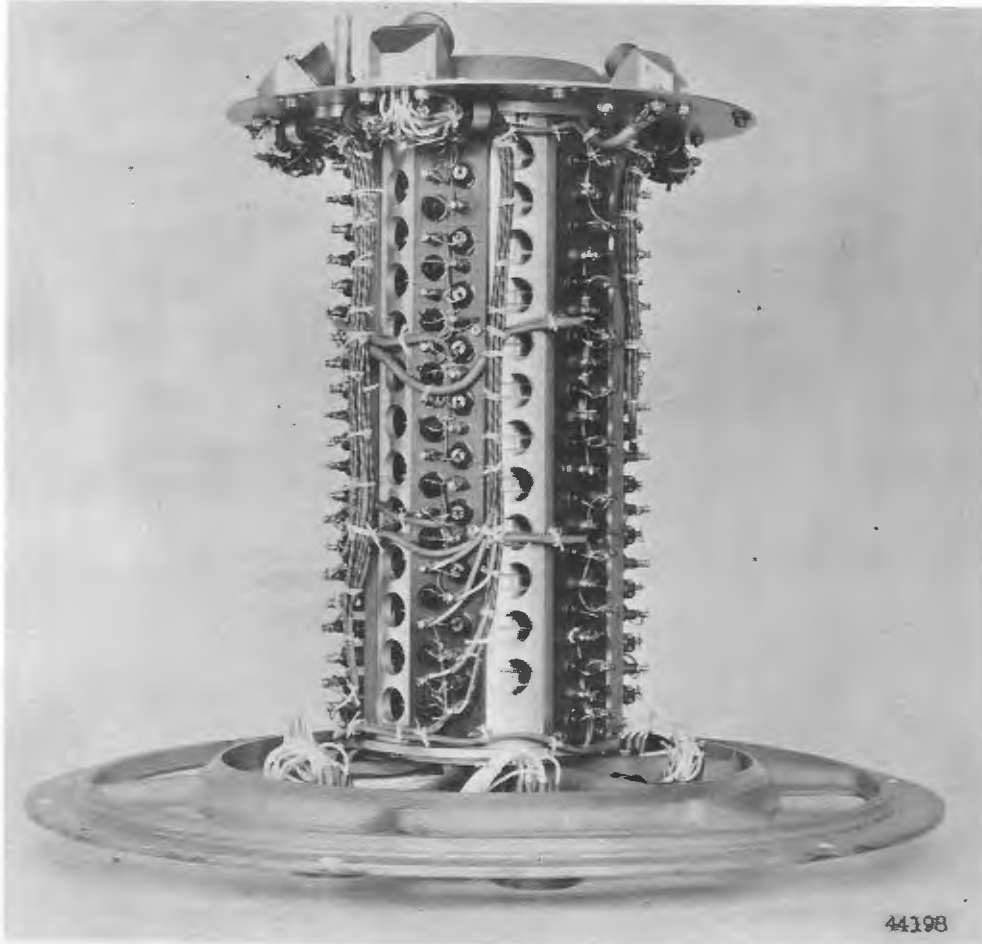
Slip-ring assembly with cover removed (Unclassified)
